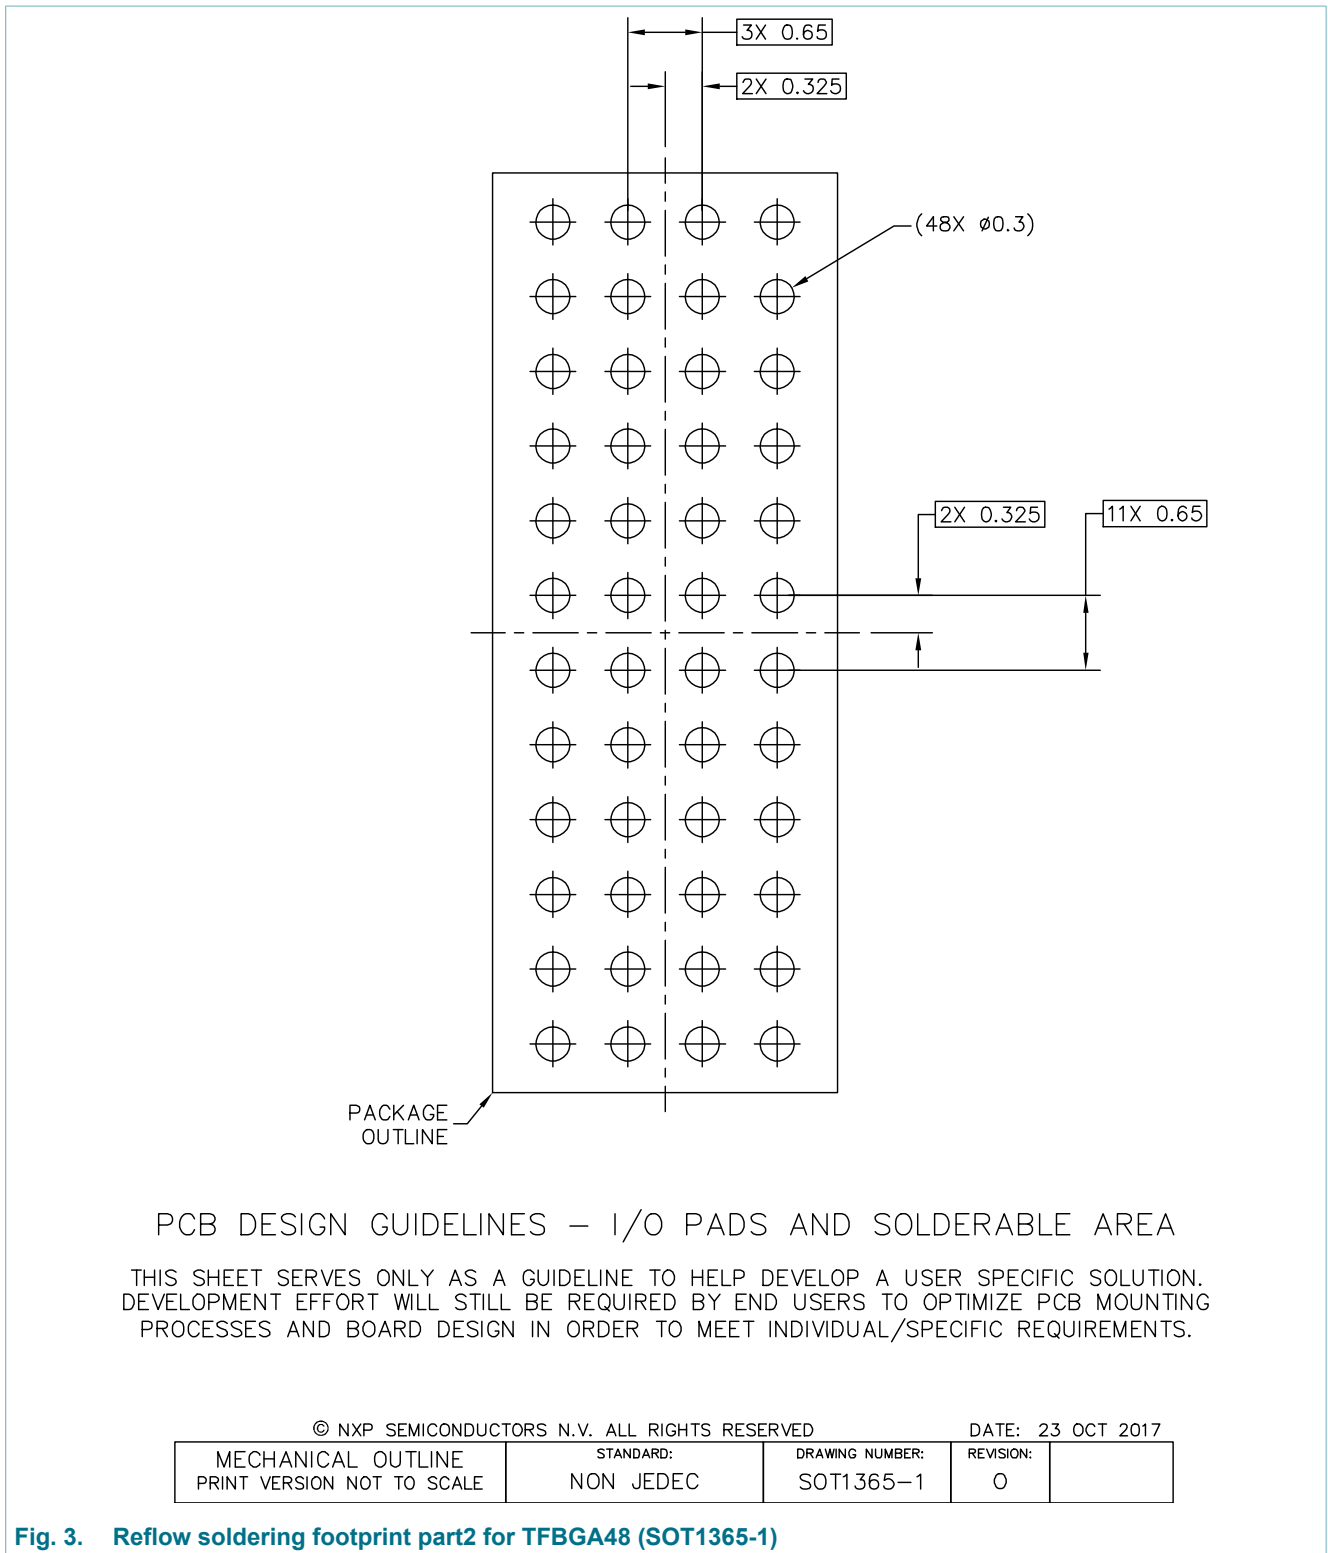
Reflow soldering footprint part2 for TFBGA48 (SOT1365-1)
